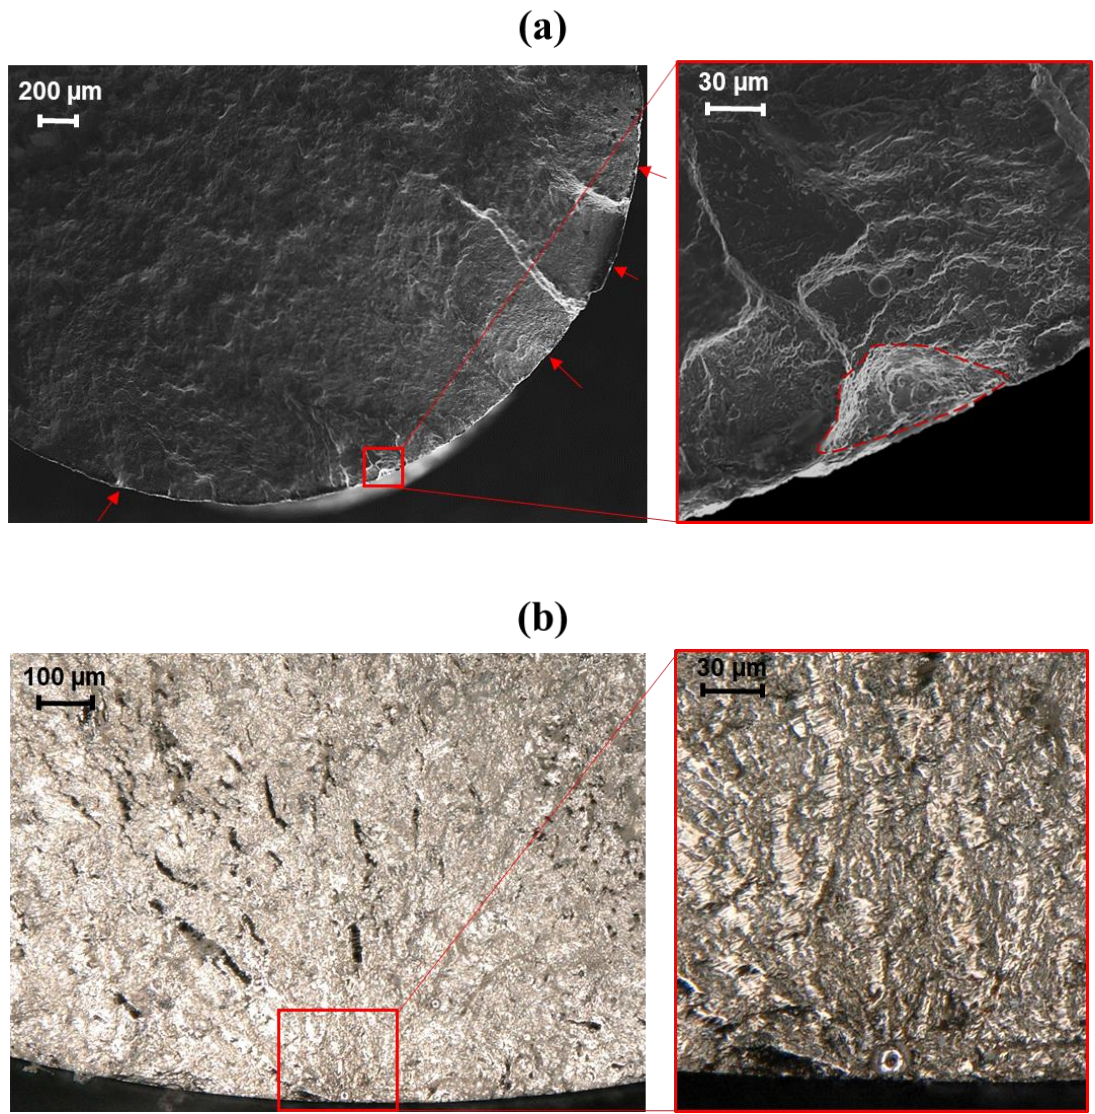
Fracture surface of L-PBF 17-4 PH SS specimens subjected to CA-H1025 heat treatment showing crack(s) initiated from (a) multiple micro-notches in an as-built specimen, and (b) a single spherical pore in a machined specimen.
